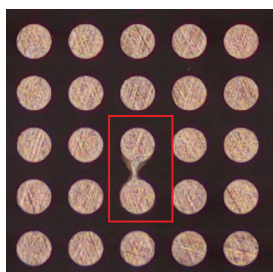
The molding compound under “Chip A” component after p-lapping (red box highlighted voids location between two adjacent solder balls)
